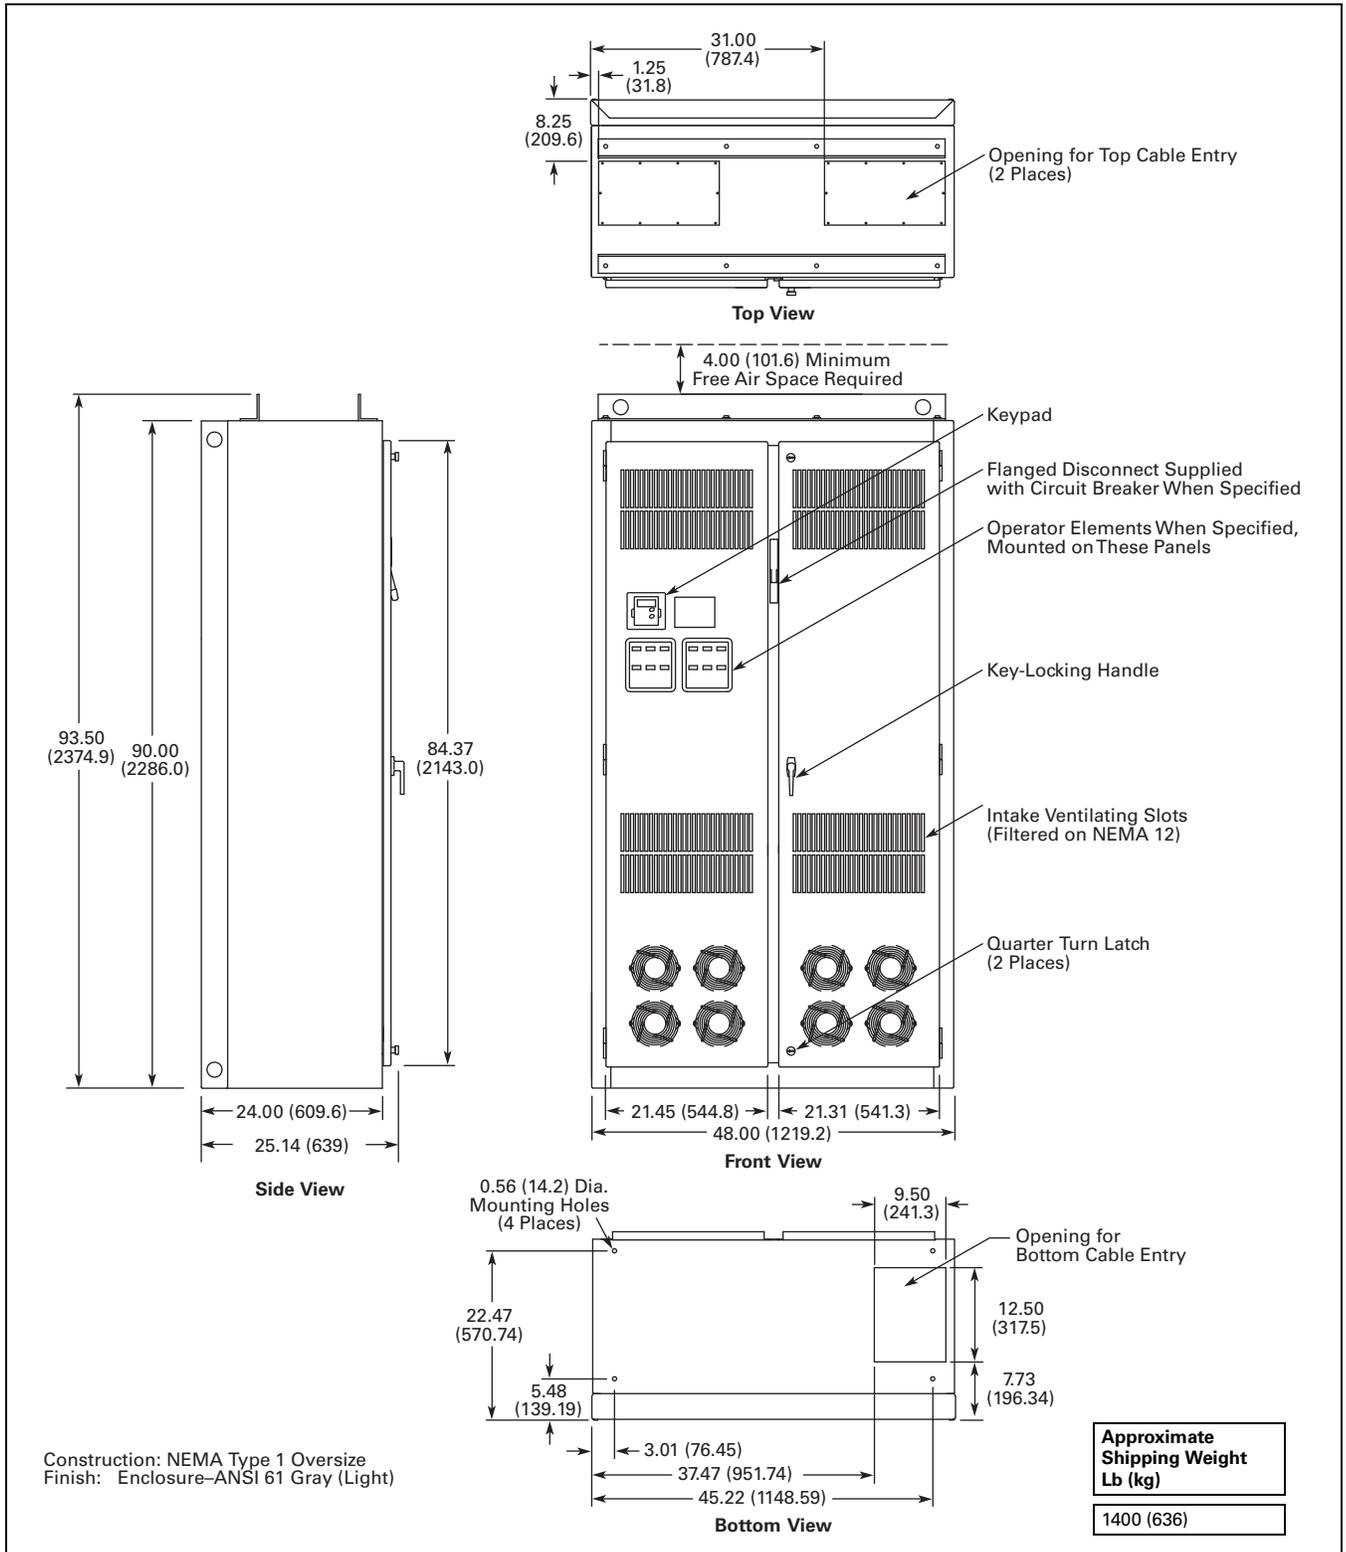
Enclosure Size 8—Approximate Dimensions in Inches (mm)
